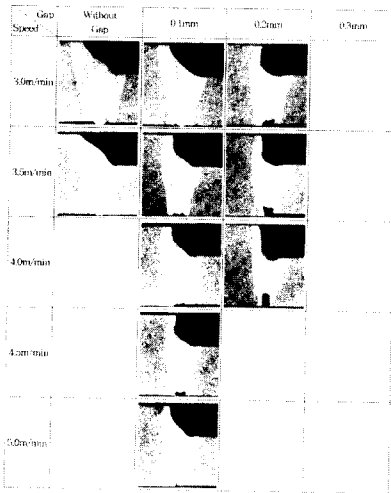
(b) Macrographs of cross-sectioned weld beads with different welding speed in case of 3.2mm+2mm combination
